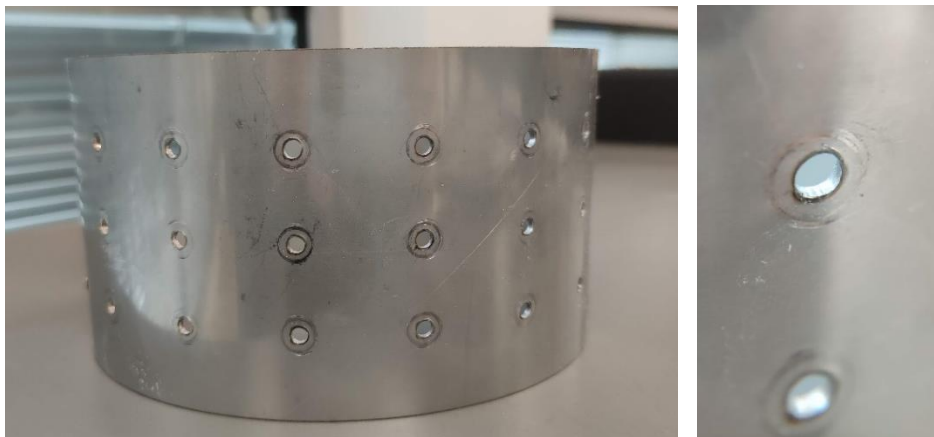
Post-testing inspection of the sleeves (exterior sleeve; specimen #3)
